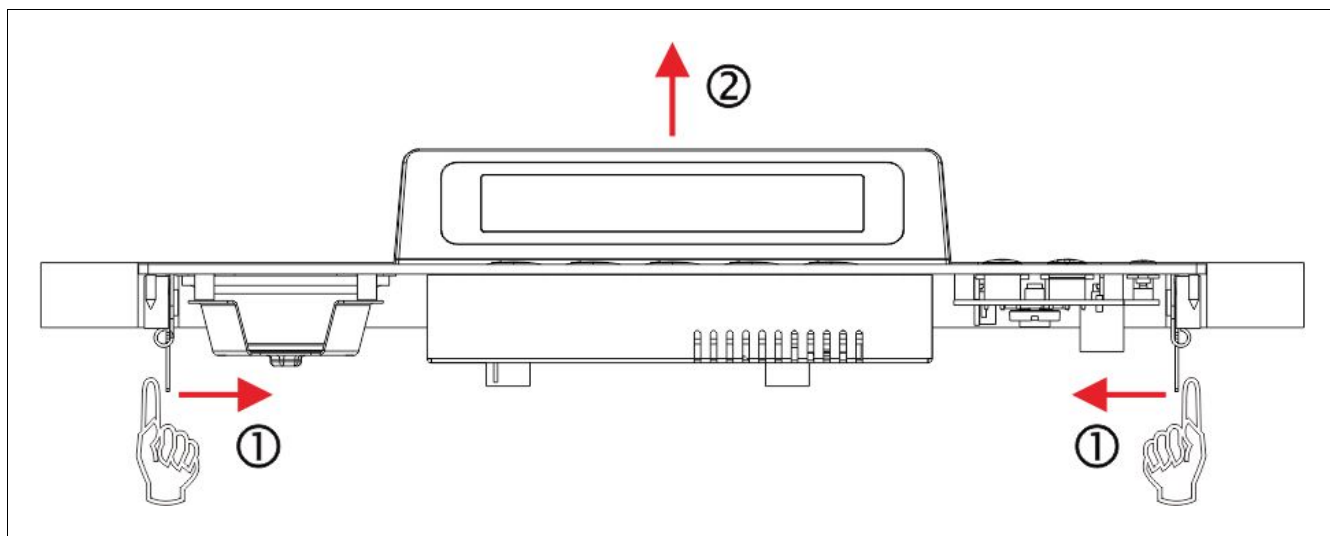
Disassembly of HCS-48U9 series flush-mounted congress unit (method b)
